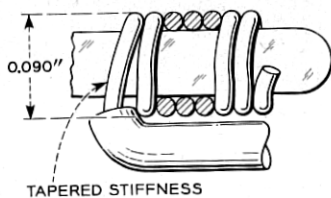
Solderless wrapped connection of modified U-relay terminal.
